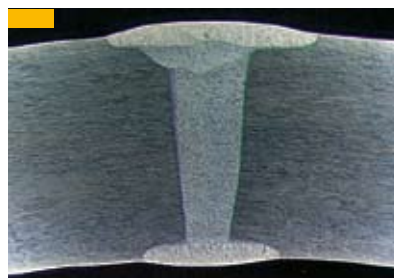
Welding of BUTTING riser pipes made of superduplex for the oil and gas industry
